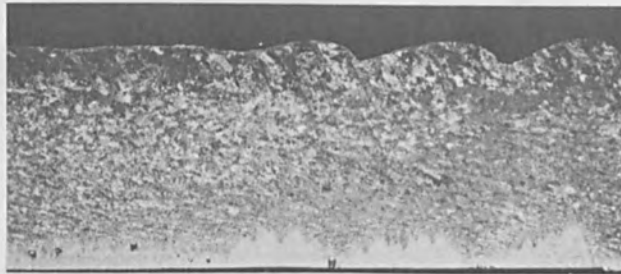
Penetration Pattern Titanium Weldment.
